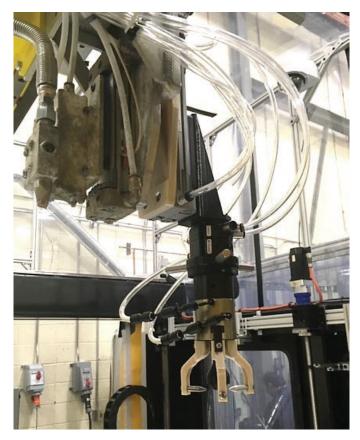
Full tool changer assembly demonstrated on MVP's thermoset printer
